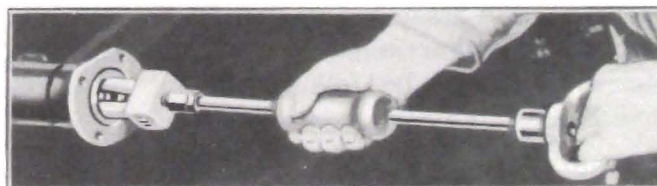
Removing Wheel Bearing and Oil Seal with Remover J 1436
